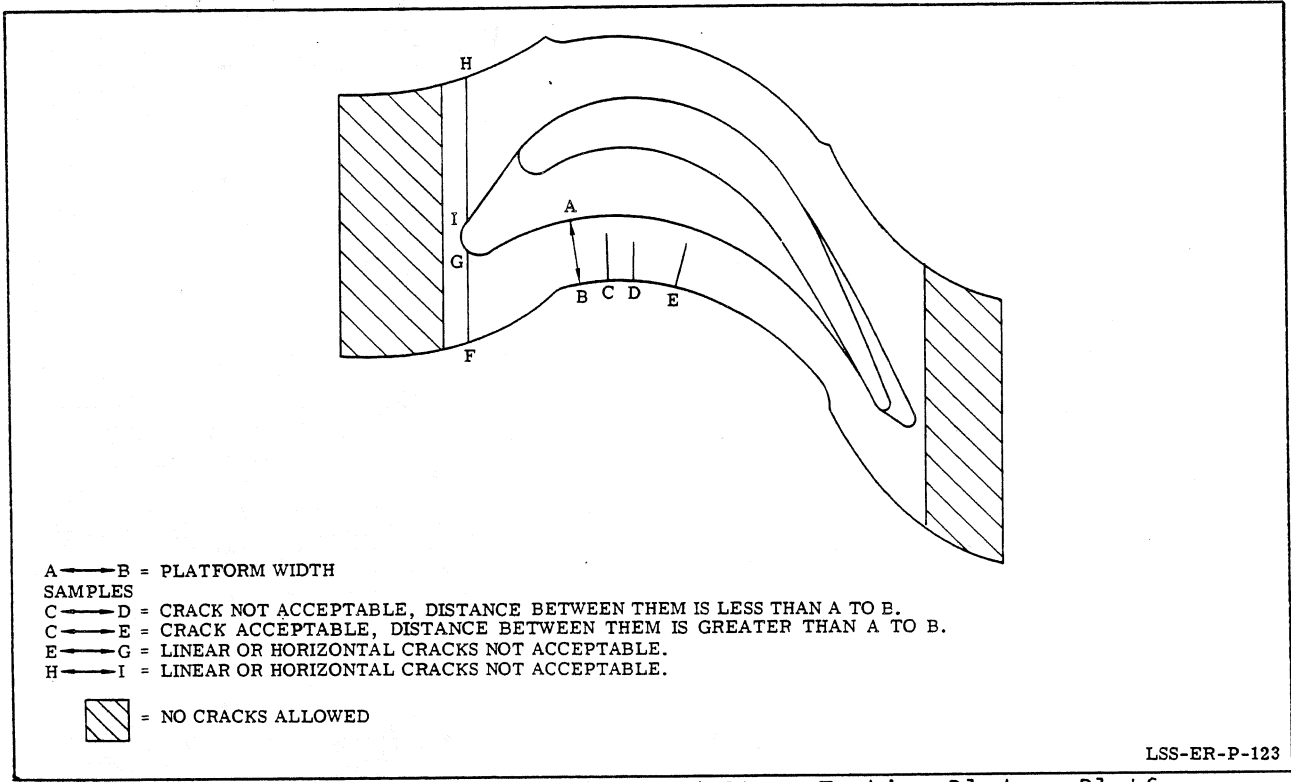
HPFTP First- and Second-Stage Turbine Blade - Platform Crack Definition
